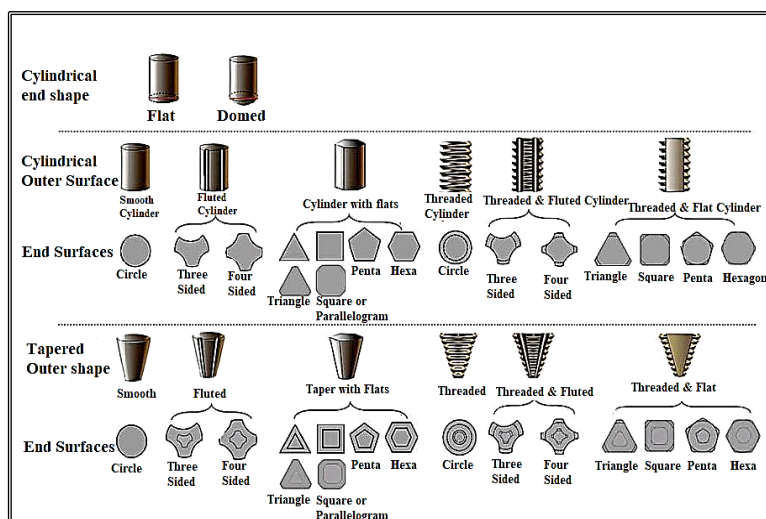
SHAPE OF FSW TOOLS PROBE
